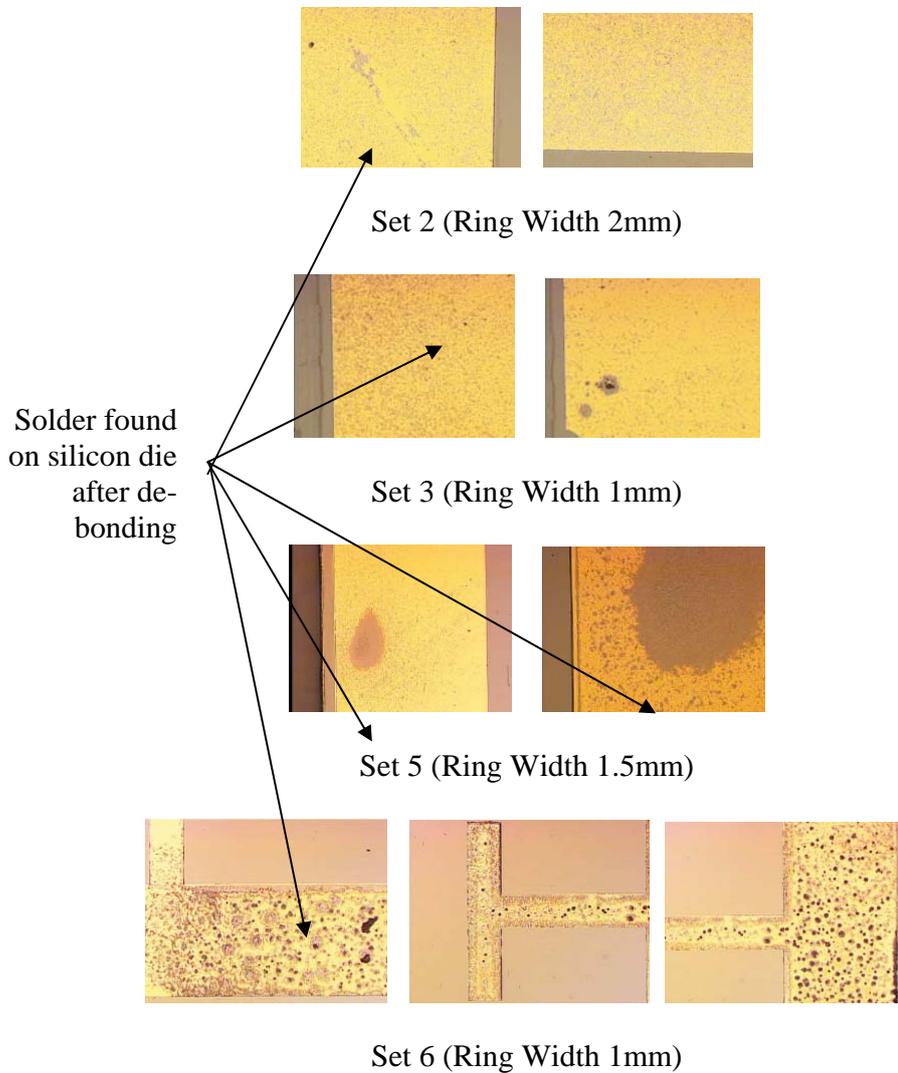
Solder wetted gold metallization on the bottom chip (set 2 – set 6)
